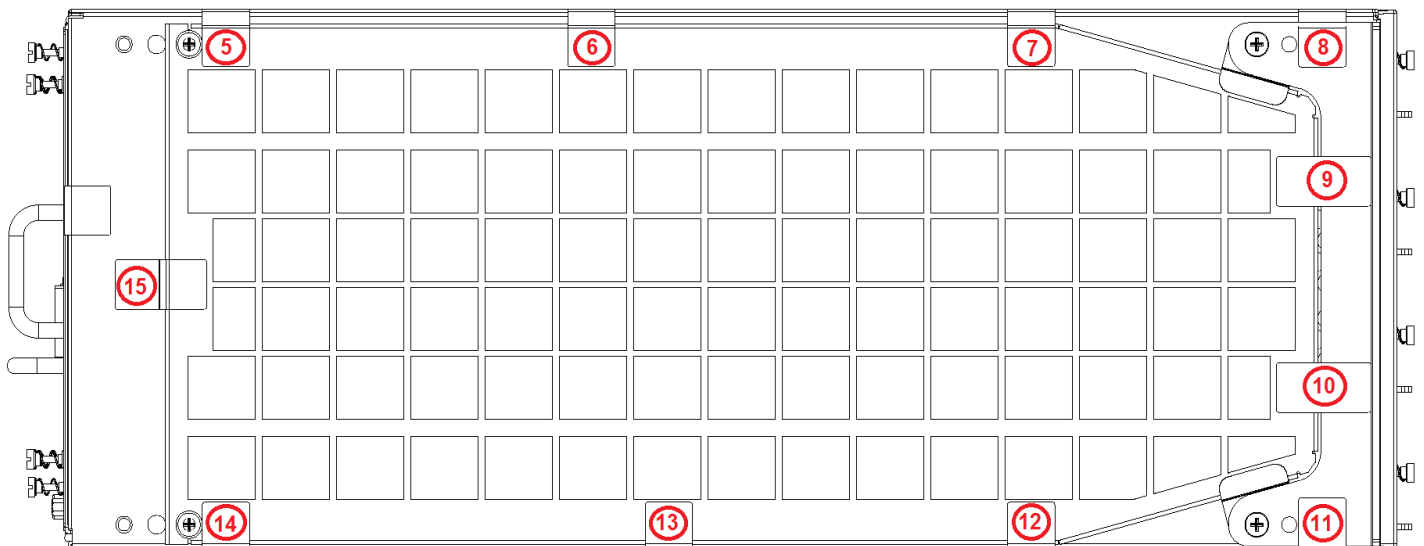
Tamper Evident Seal Placement on Back of 5412 zl Chassis or 8212 zl Chassis
